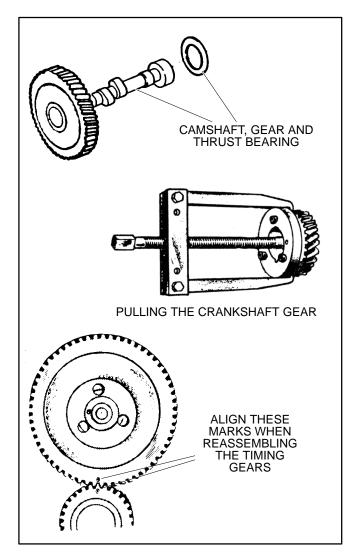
TIMING GEARS AND CAMSHAFT
